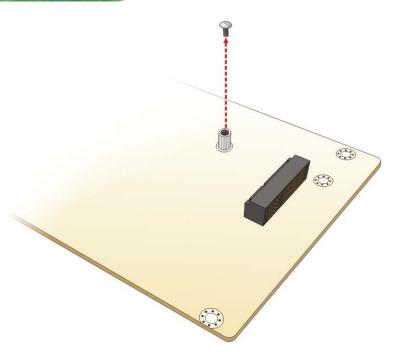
Removing the Retention Screw for the iRIS-1010 Module
